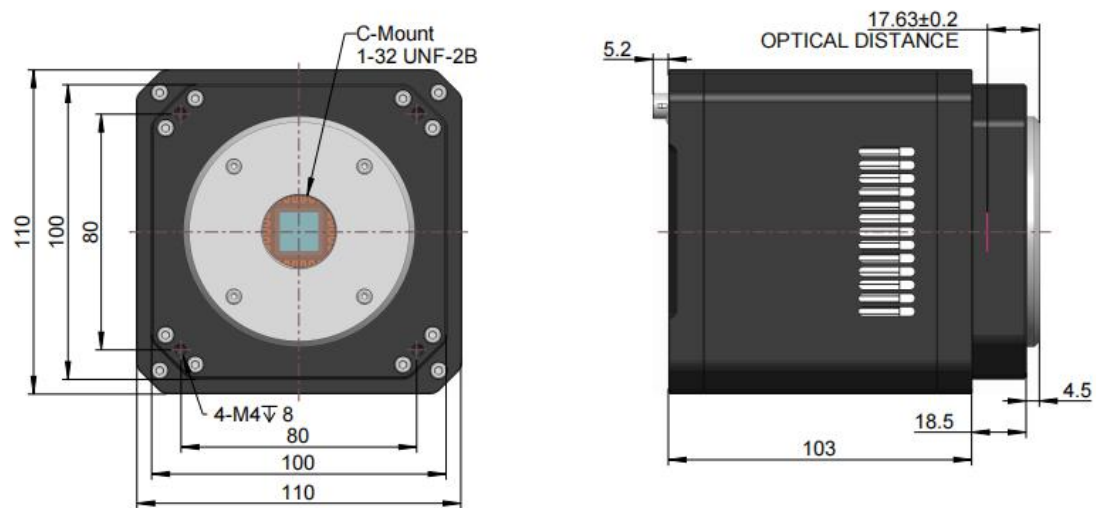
MAX04AM& MAX04AM dimensions (mm)
